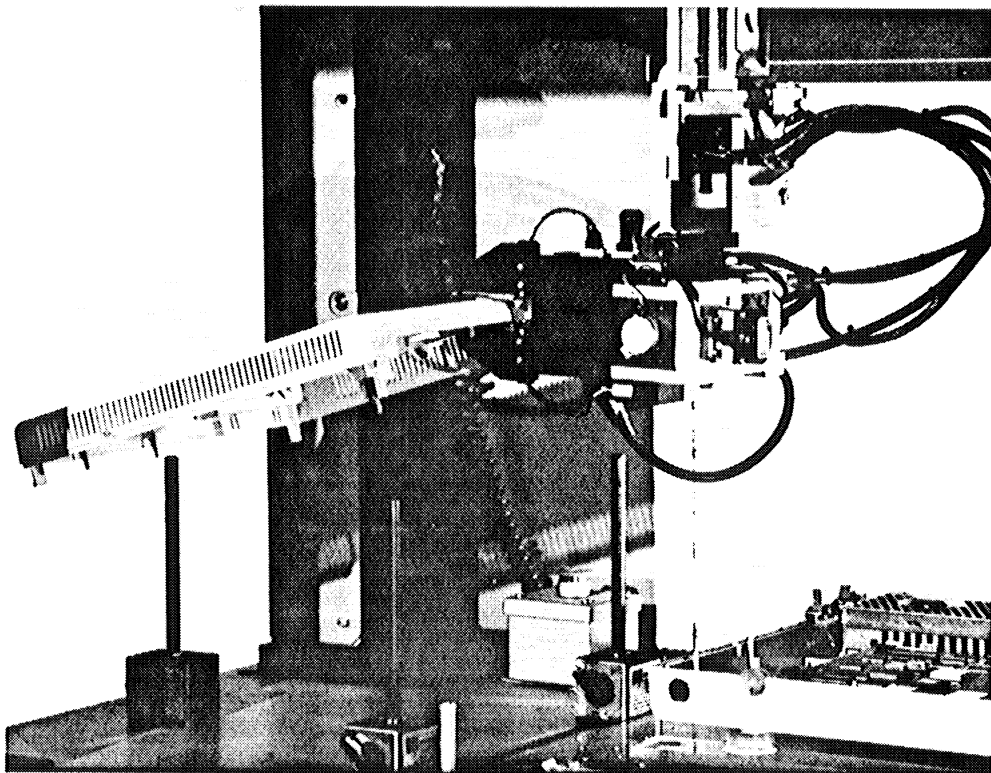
b. Arm Is Moving Up Till Bottom Surface Touches The Gripper
